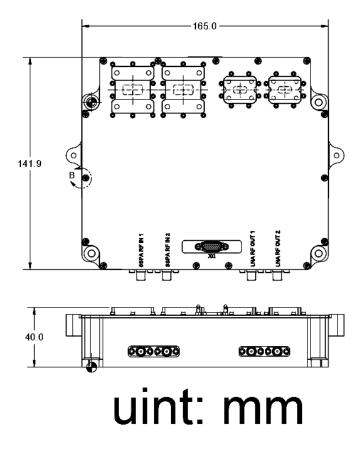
Outline Drawing of K/Ka-band Integrated LNA and SSPA
